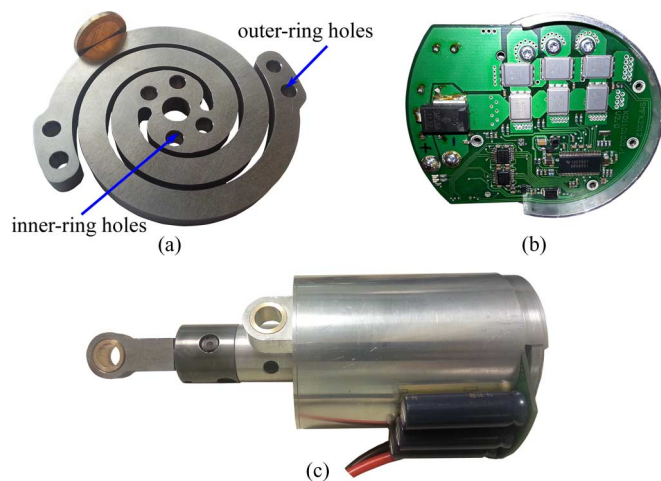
MW* actuation system. (a) Photo of the double spiral series spring. Through those four inner-ring holes, four shoulder screws connect the inner ring to the leverarm; through those four outer-ring holes, four dowel pins connect the outer ring to the distal segment. See Fig. 3 as well. (b) Drive electronics mounted at the back of the linear actuator; (c) linear actuator assembly.
